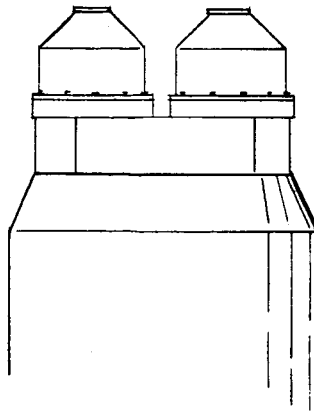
RTG Fuel Load Mechanism Removed
